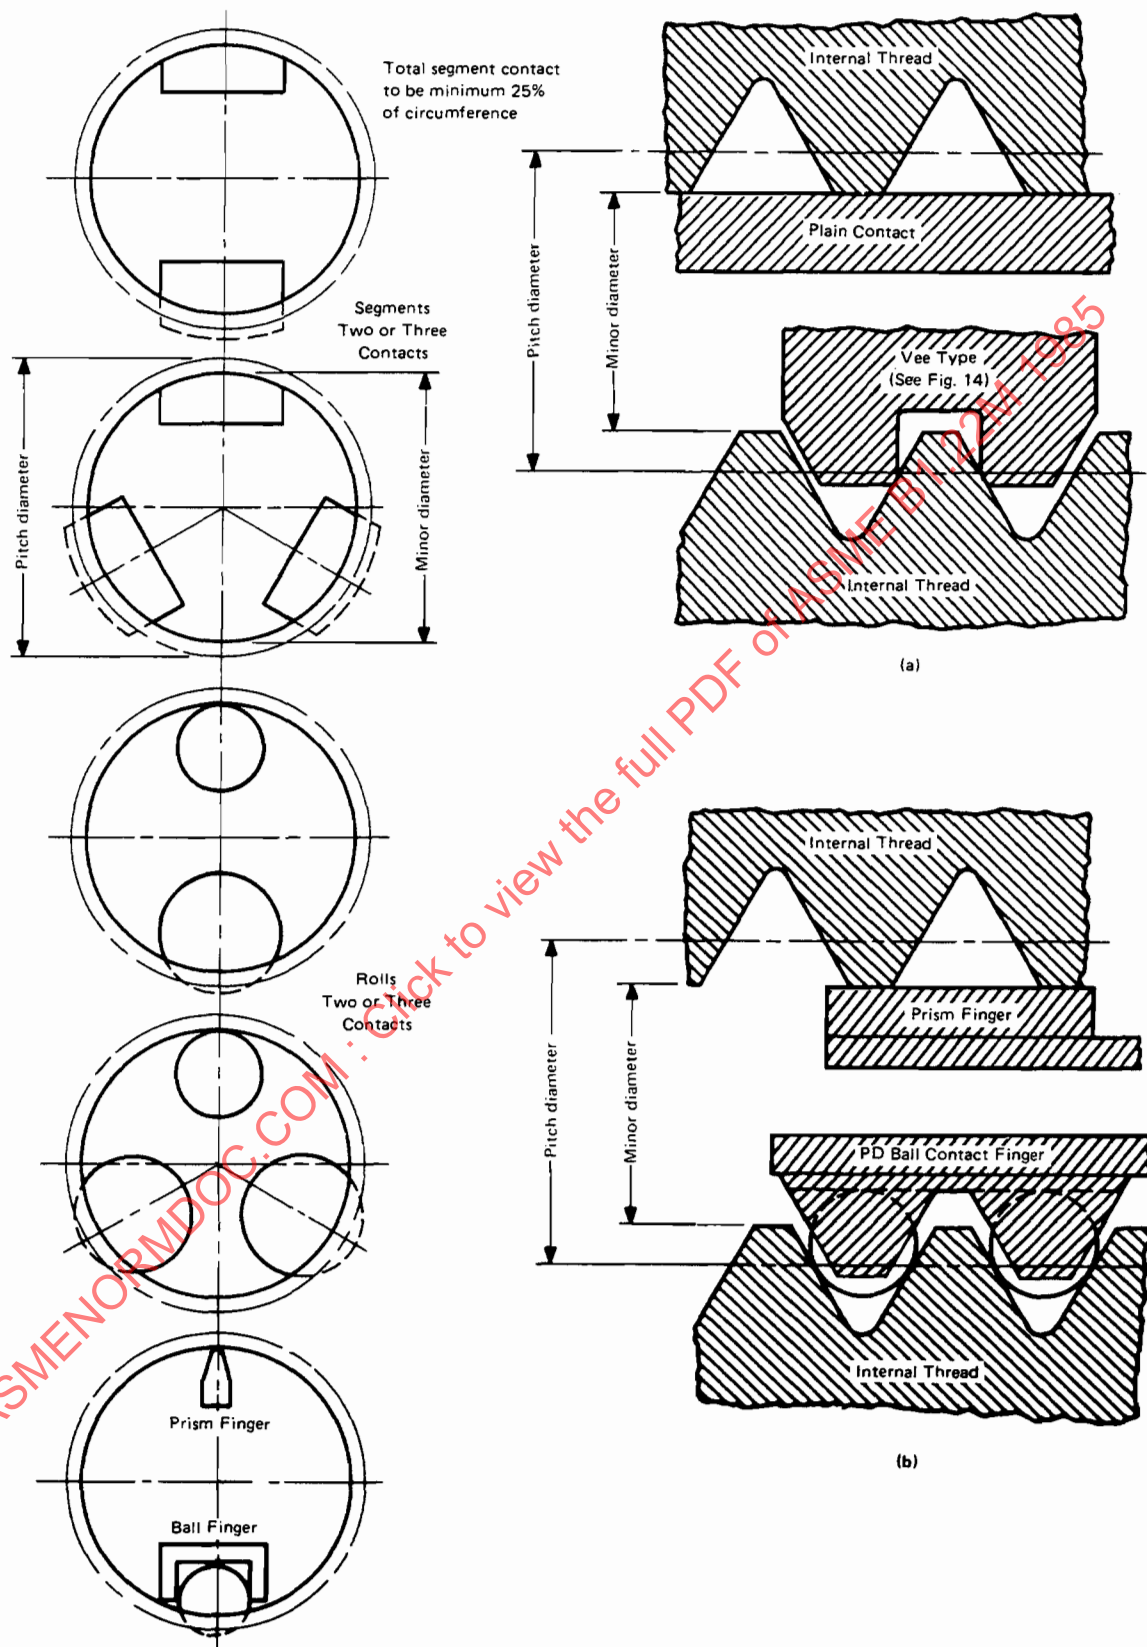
INDICATING THREAD GAGES — DIAMETER RUNOUT — MINOR TO PITCH DIAMETER
